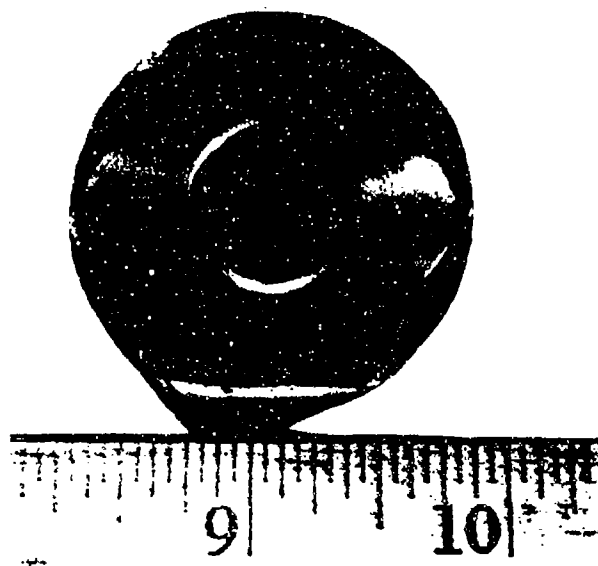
Photograph of bushing assembly, as-received, with Bushing 2 located at the center.
